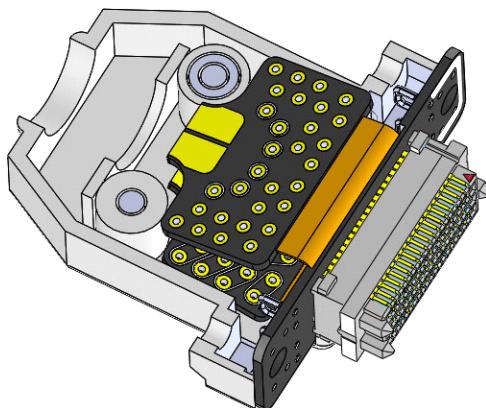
EXC-8000CON Assembly Inserted Into Hood
